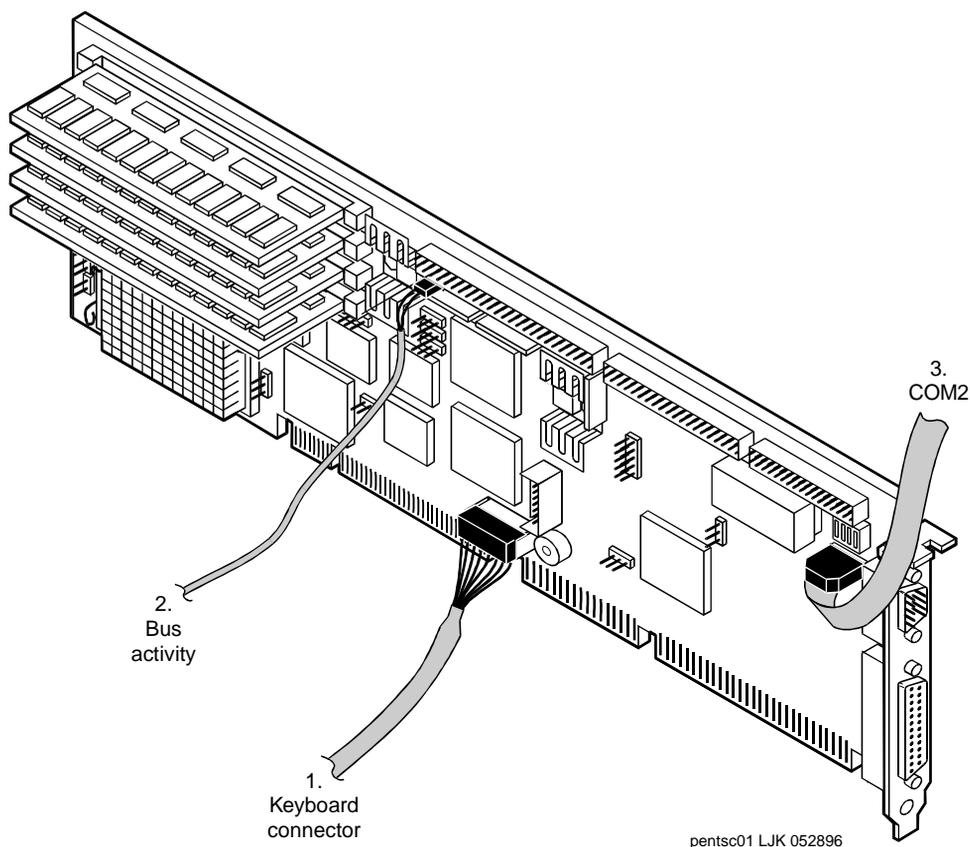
Attaching Cables to the P5 75 MHz CPU Circuit Card - Part 1
